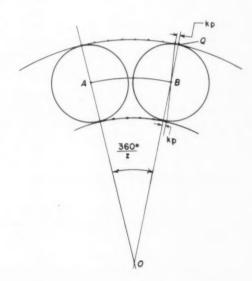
Gear-tooth relationships that are necessary for assembly of a planet gear in the simple basic epicyclic gear arrangement seen in Fig. 1.
